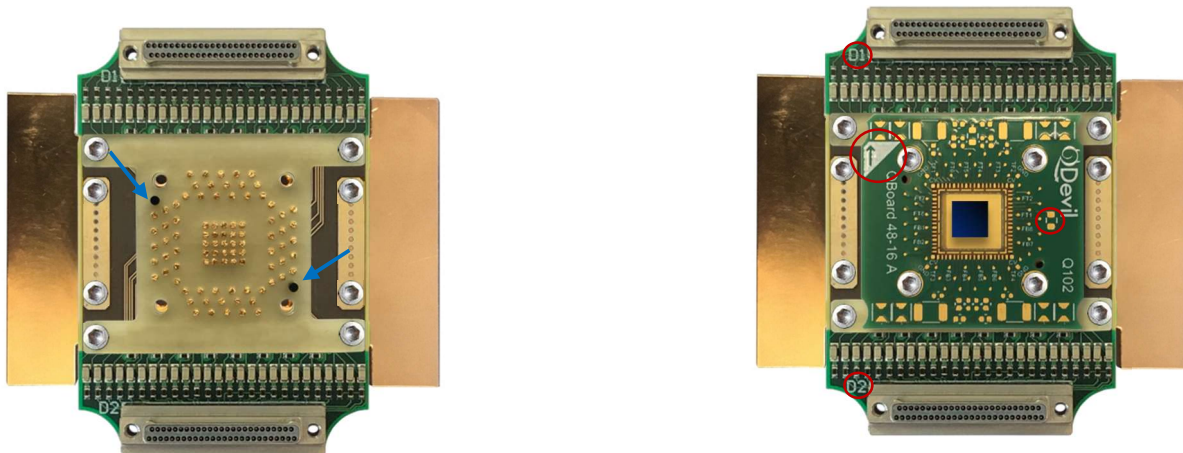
The QBoard assembly consists of four parts which are assembled in a stack using the provided Titanium screws: The mounting bracket, the motherboard, the interposer, and the daughterboard.
